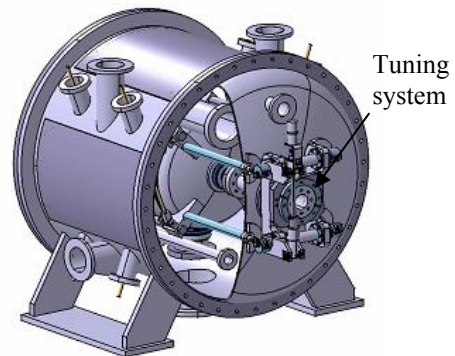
3D cryomodule drawing integrating 1 cavity.
